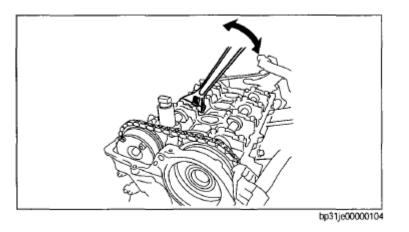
Removing Oil Seal Using Flathead Screwdriver
